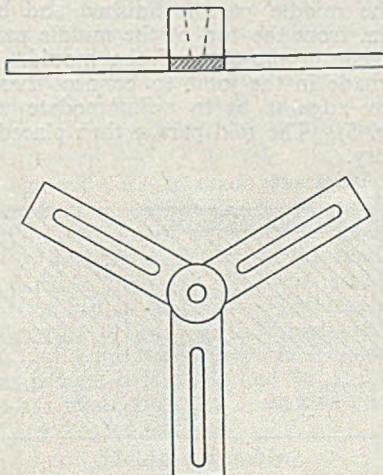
Cross Spindle Base Forming the Seating for the Strickles.
